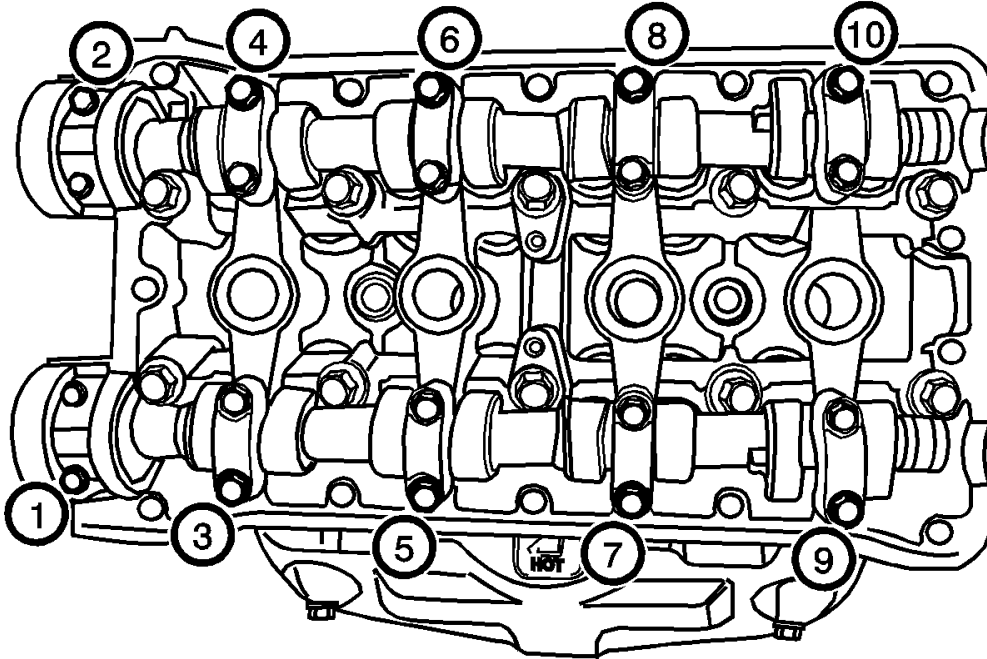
Installing/Removal Sequence Of Camshaft Cap Bolts
